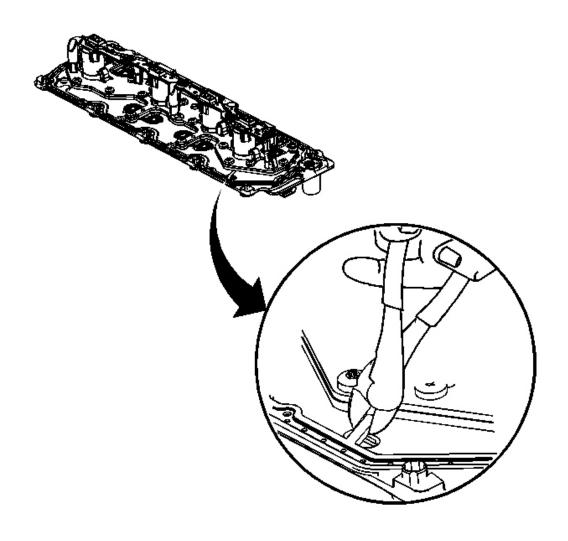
Cutting Retaining Straps On Outer Gasket Courtesy of GENERAL MOTORS CORP.
